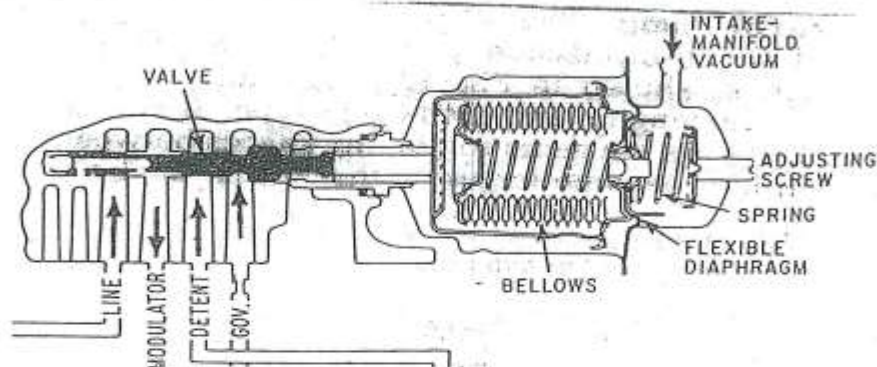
Sectional view of the vacuum-modulator assembly. (Oldsmobile Division of General Motors Corporation)
